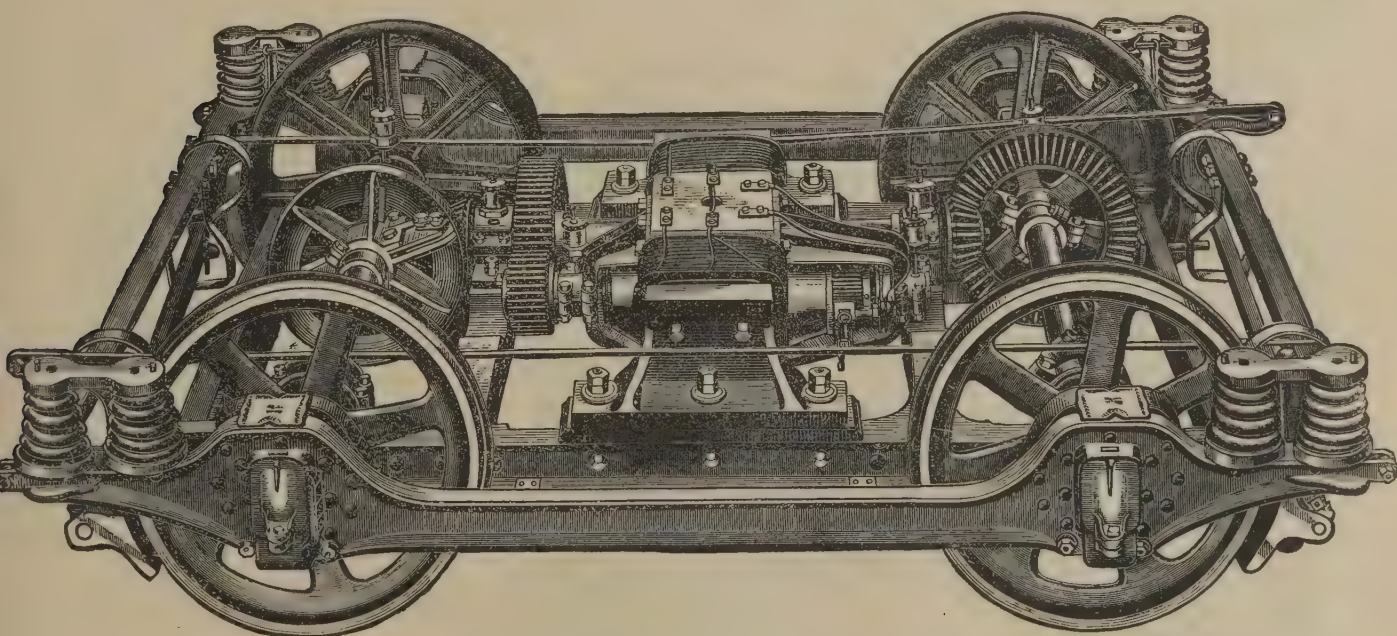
DETROIT ELECTRIC WORKS' MOTOR AND TRUCK.
